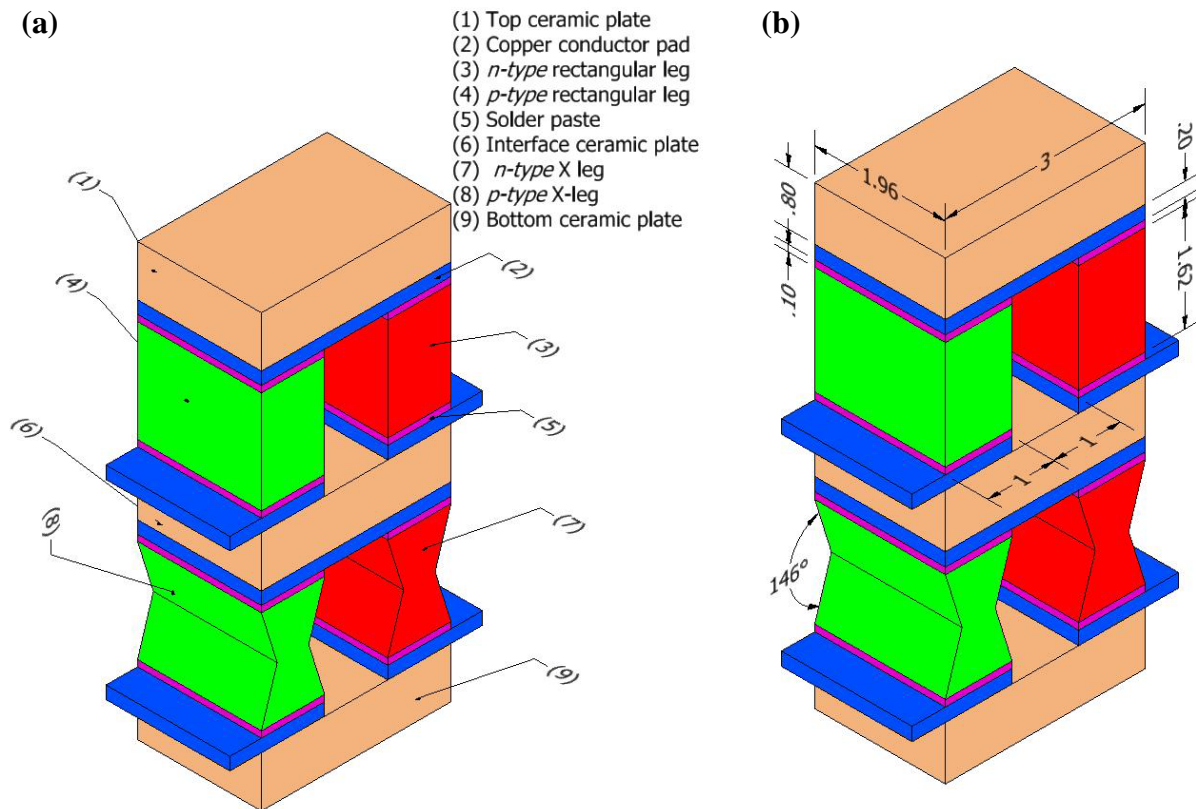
Two-stage variable leg STEG (a) Exploded view (b) Dimensioned diagram.
